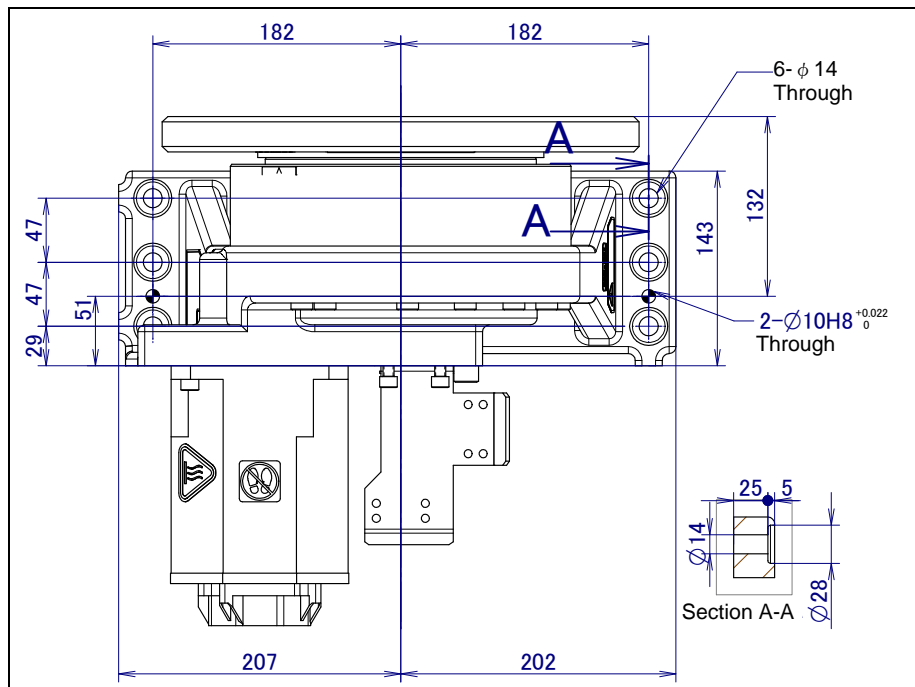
(b) Dimensions of the base of the positioner main body
